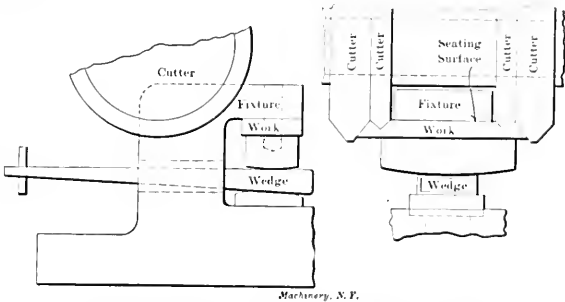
A Fixture for Holding the Piece shown in Fig. 30.
